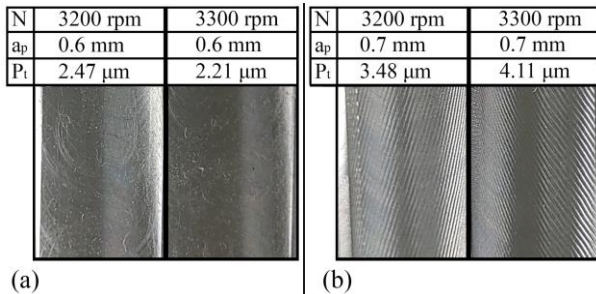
The surface topography of Ti-alloy workpieces: (a) under stable machining and (b) under unstable machining with noticeable chatter marks.
